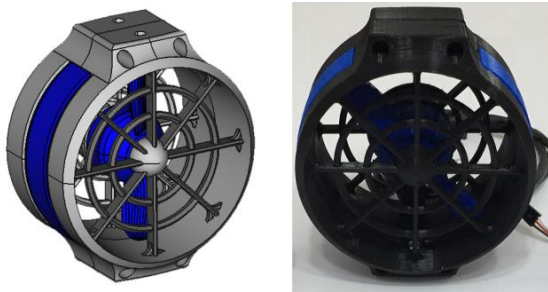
3D model of ETR100 thruster (left) and 3D printed model (right).
